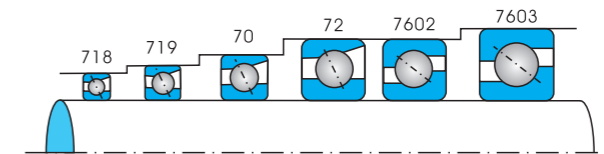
The comparison of each dimension series between angular contact ball bearings and ball screw support bearings
